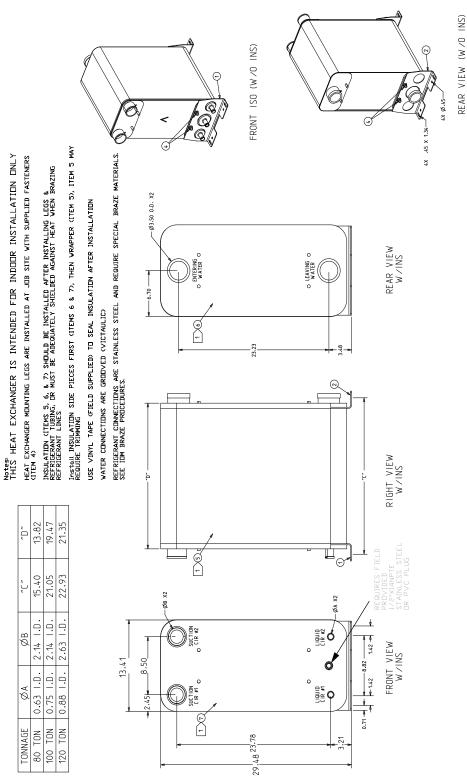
80, 100, and 120-Ton Evaporator Chiller
